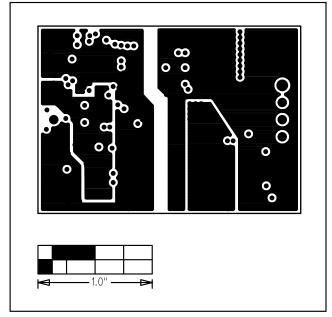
MAX5051 EV Kit PC Board Layout—Inner Layer, GND Plane
